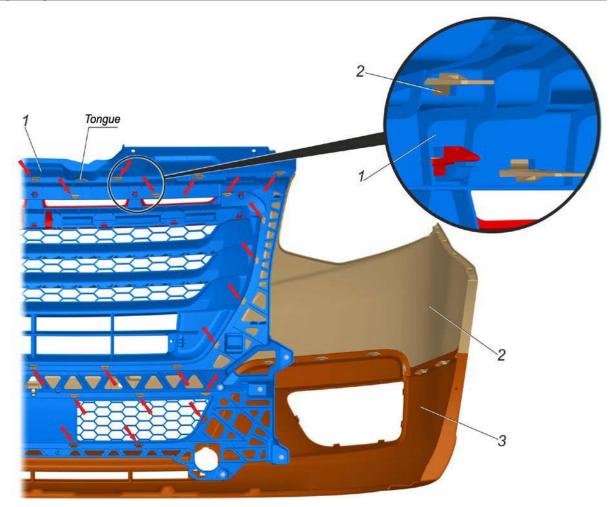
Fasteners of front bumper panel parts: 1 – radiator grille; 2 – front bumper panel (upper); 3 – front bumper panel (lower)
